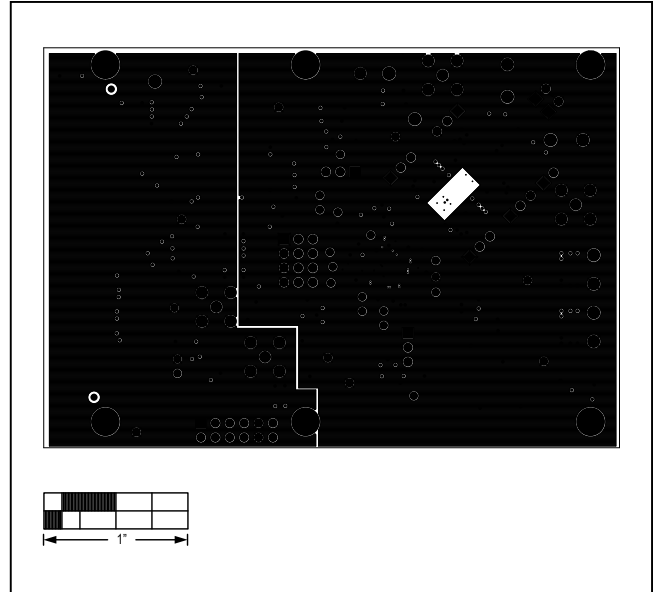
MAX11905 Differential EV Kit PCB Layout—Layer 2
